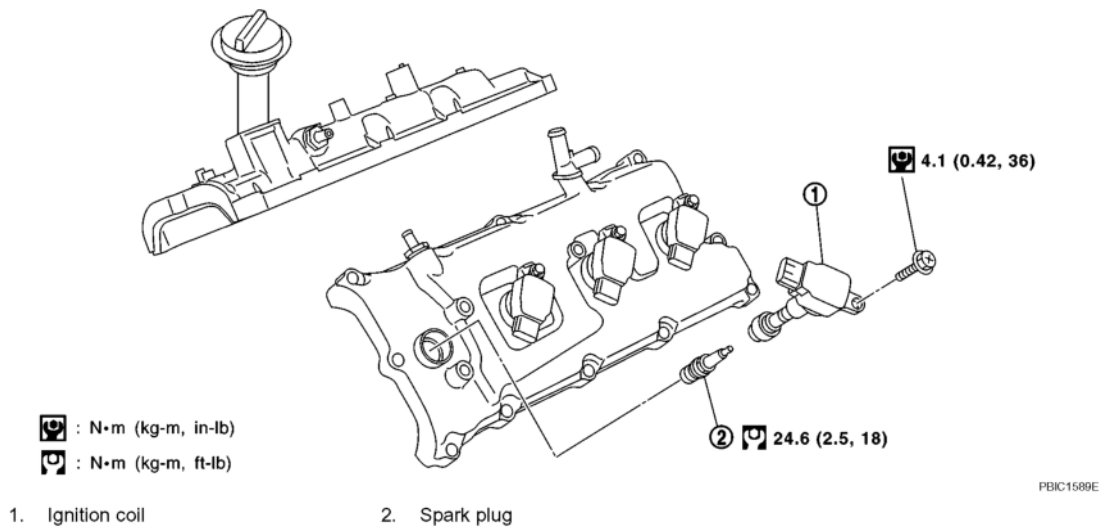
Identifying Ignition Coil Components With Torque Specifications
